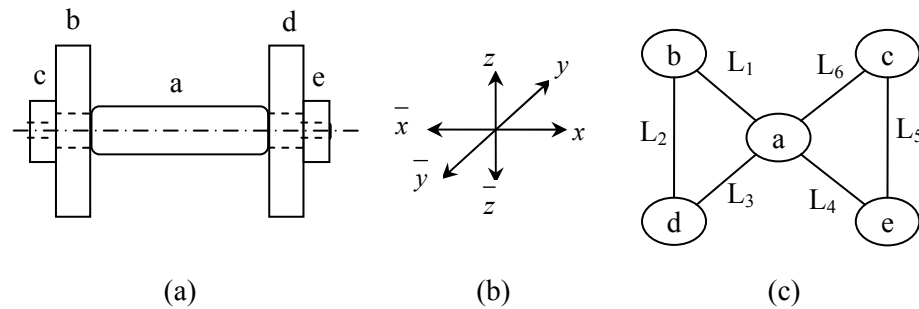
(a): A simple example of a product (Grinder assembly); 3.1(b): Directions for assembly or disassembly; 3.1(c): Liaison graph model of grinder.
